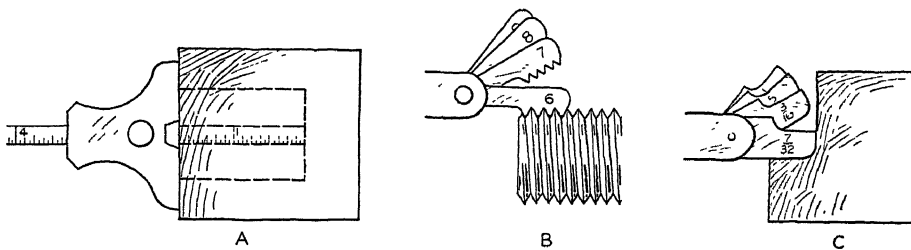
A, depth gage; B, screw-pitch gage; C, fillet and round gage.
